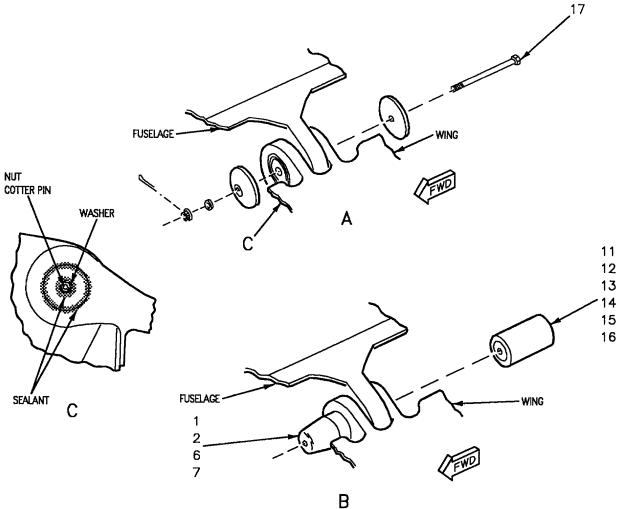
Inner Wing Removal and Installation Pins (Sheet 2)
